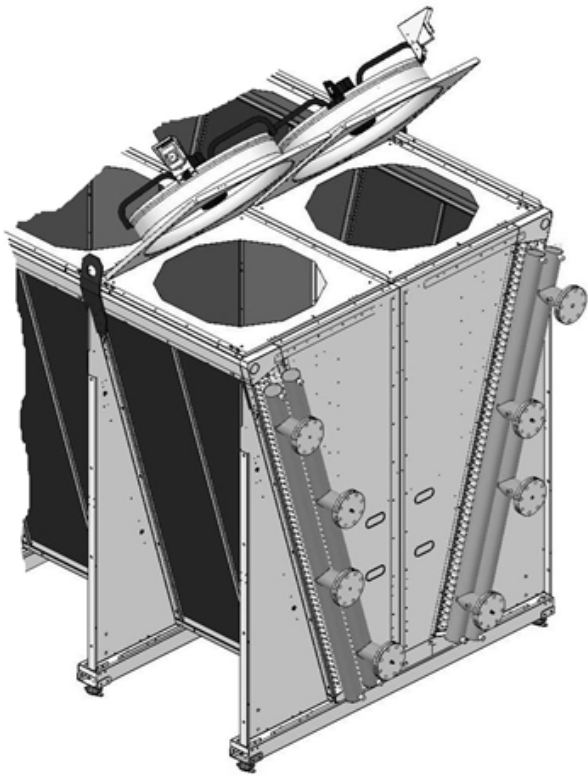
Before opening, disconnect the power supply of the motor fan. Remove the fixing screws of the opening shroud.
